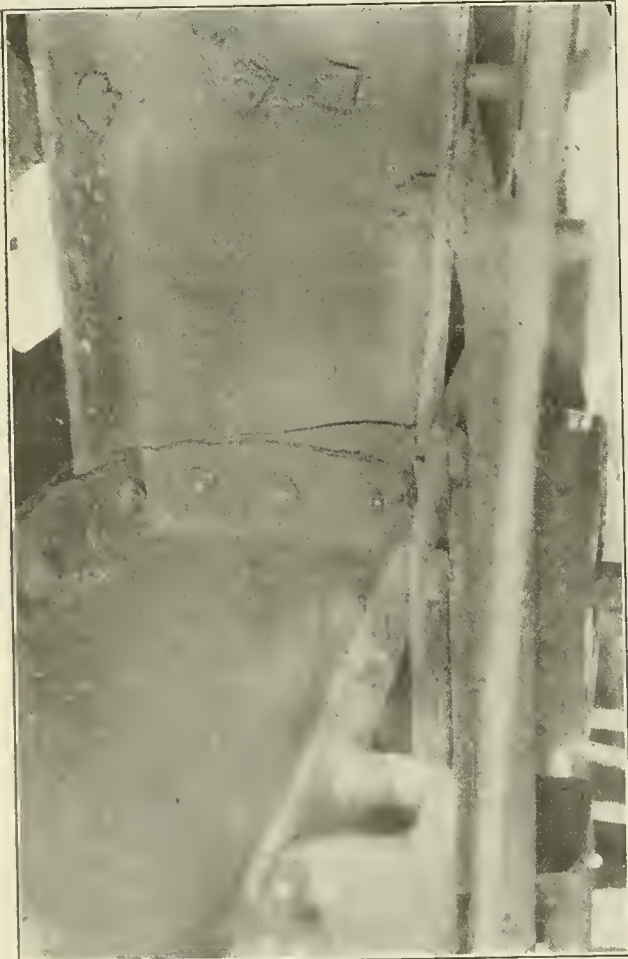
CRACKED CENTER SILL ON GL HOPPER CAR.
